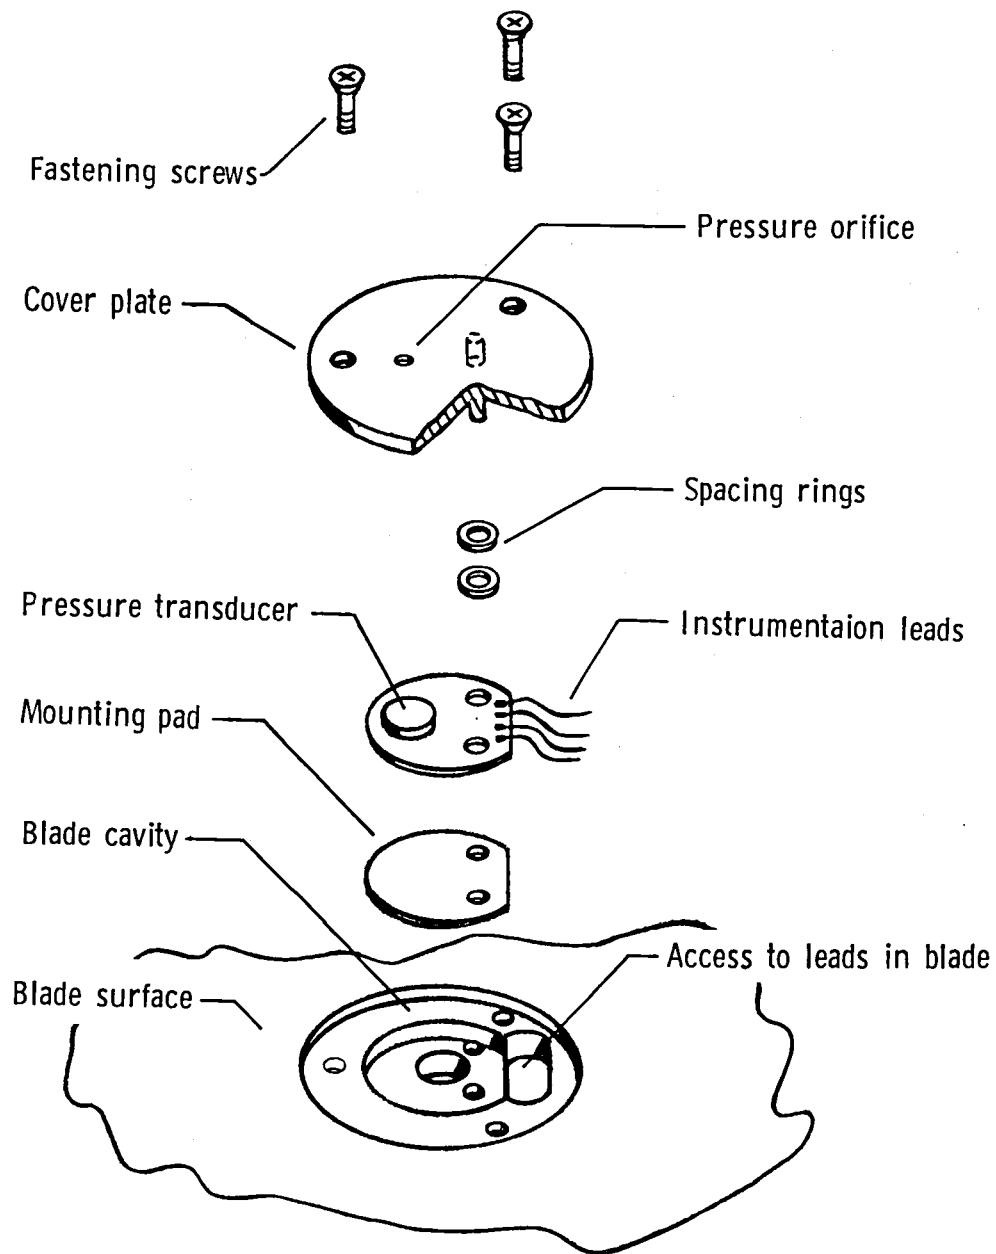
Exploded-view drawing of typical pressure-transducer installation.
